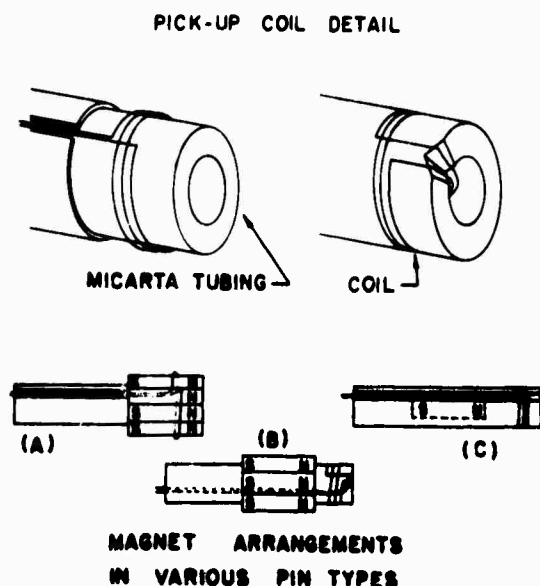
Pick-up coils and magnetic pins. Three-turn coils of No. 36 HF wire were wound on stock Micarta tubing (usually 2 in. long by 3/8 in. o.d. by 1/4 in. i.d.). Pin type A consisted of a hexagonal close-packed arrangement of seven small Alnico bar magnets (7/8 in. long by 1/4 in. by 1/8 in.) glued to a Micarta rod. One of the magnets in the external ring was wrapped with insulation to break up a conducting circuit that would have prevented the flux from changing in the pick-up loop. Type B had six small Alnico bar magnets taped around the outside of the Micarta tubing. The leads from the coil were brought back inside the tubing. Type C had a small 1/4-in. o.d. cylindrical magnet inside the tubing and leads were brought back on the outer surface.
